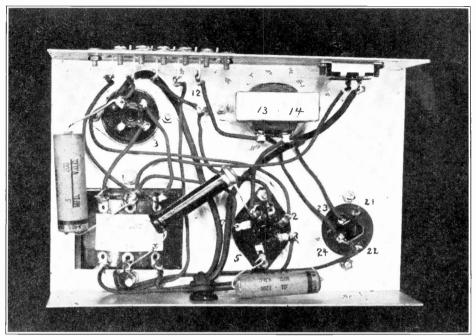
Your vibrator power pack should appear like this under the chassis after all wiring has been completed.
